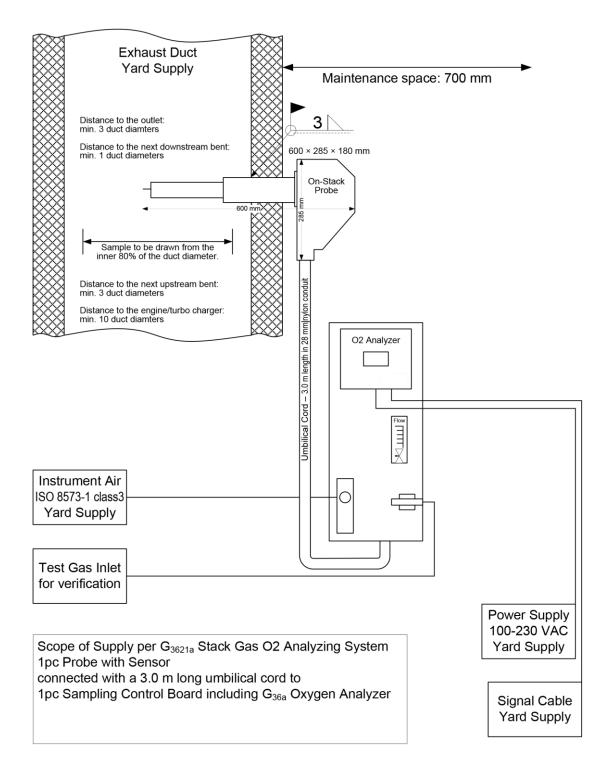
Installation Layout of the G3621a with Welding Type Probe
